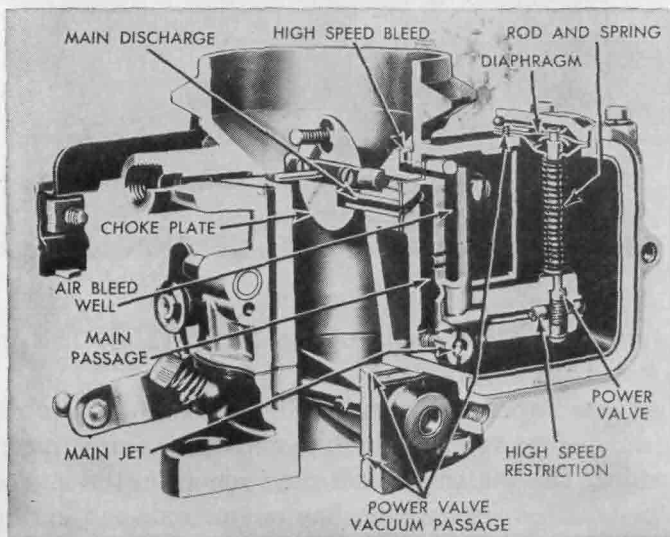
Carburetor cut away so that main fuel system and high-speed, full-power circuits can be seen. (Ford Motor Company)
